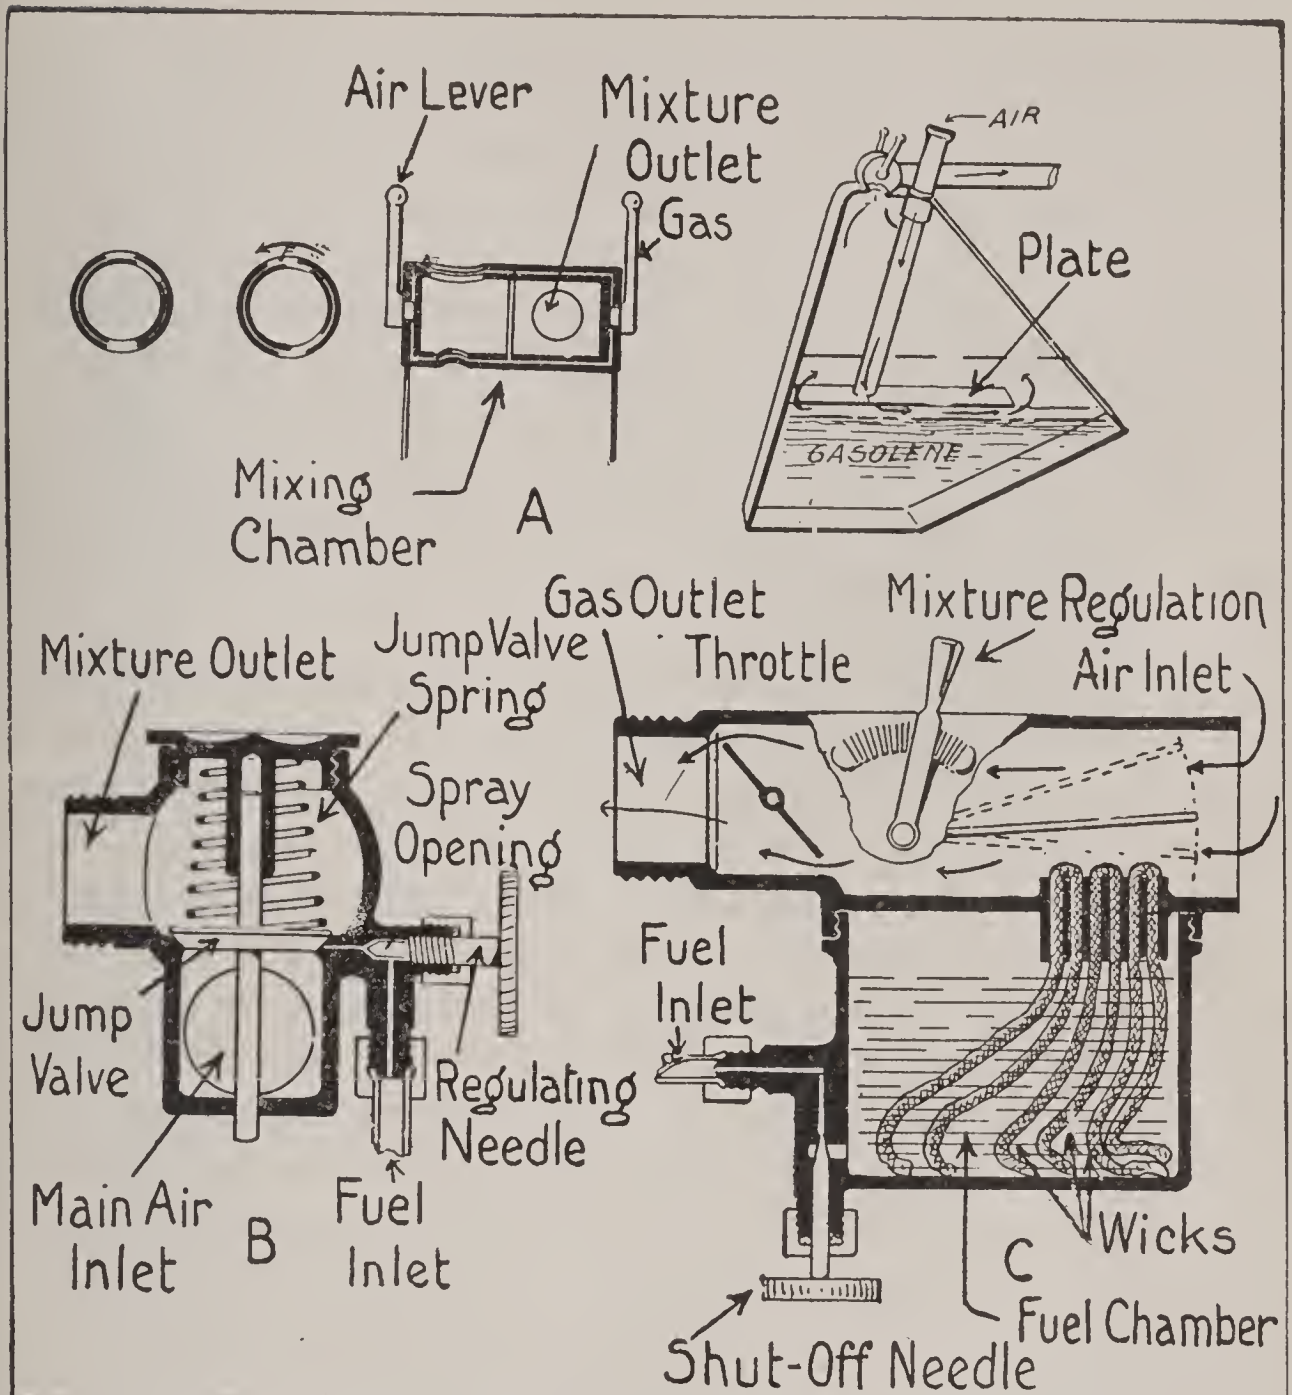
Early Types of Gasoline Carburetors. A—De Dion Bouton Surface Vaporizer. B—Simple Spraying Device With Automatic Jump Valve. C—Diagram of Wick Carburetor.
